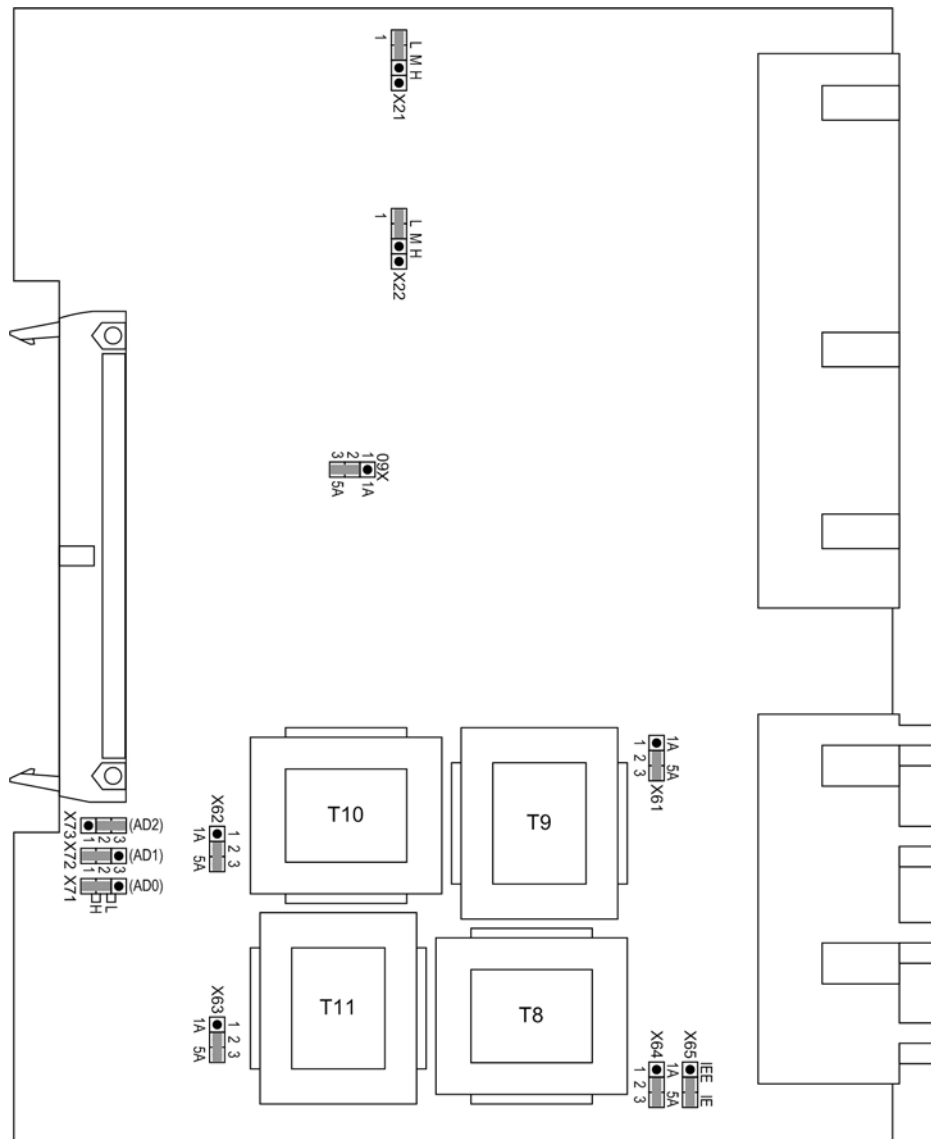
C-I/O-11 input/output board with representation of jumper settings required for checking configuration settings
